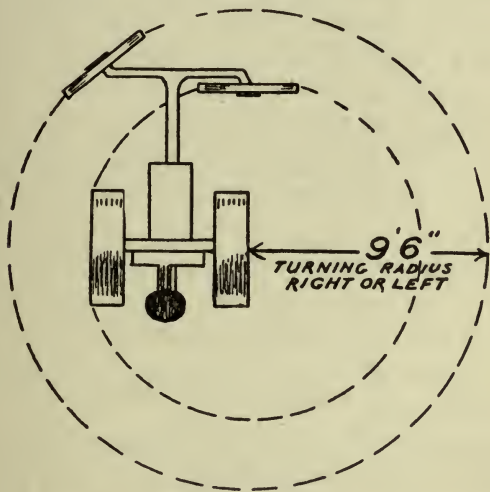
THE TURNING RADIUS OF A TRACTOR
